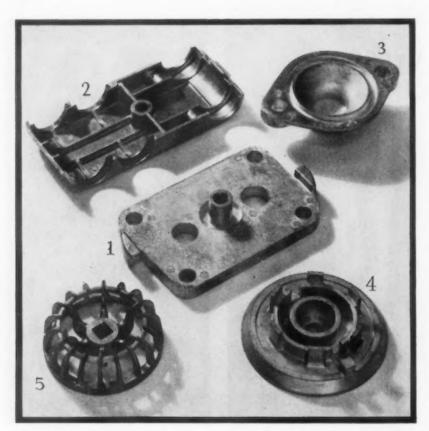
Five typical zinc-alloy die castings produced on the new high-speed machine referred to in the text. Pieces numbered 1, 3 and 4 are produced at the rate of about 3000 to 3200 per eight-hour day; piece No. 2 at 4000 per day and piece No. 5 of 5300 in eight hours, all from single cavity dies. The pieces vary in weight from about 3 to 12½ oz.
